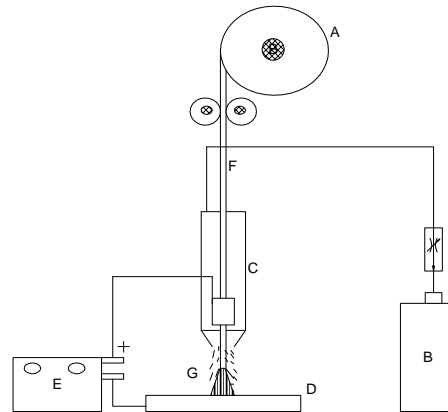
Schematic of GMAW process showing important elements A) Welding spool, B) Shielding gas cylinder, C) welding torch, D) base plate, E) welding power source, and F) consumable electrode.
